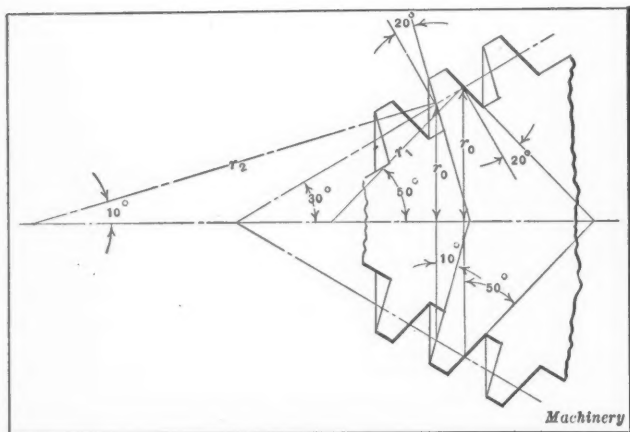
Diagram representing Section of Taper Hob of Type used for cutting Spiral Bevel Gears
